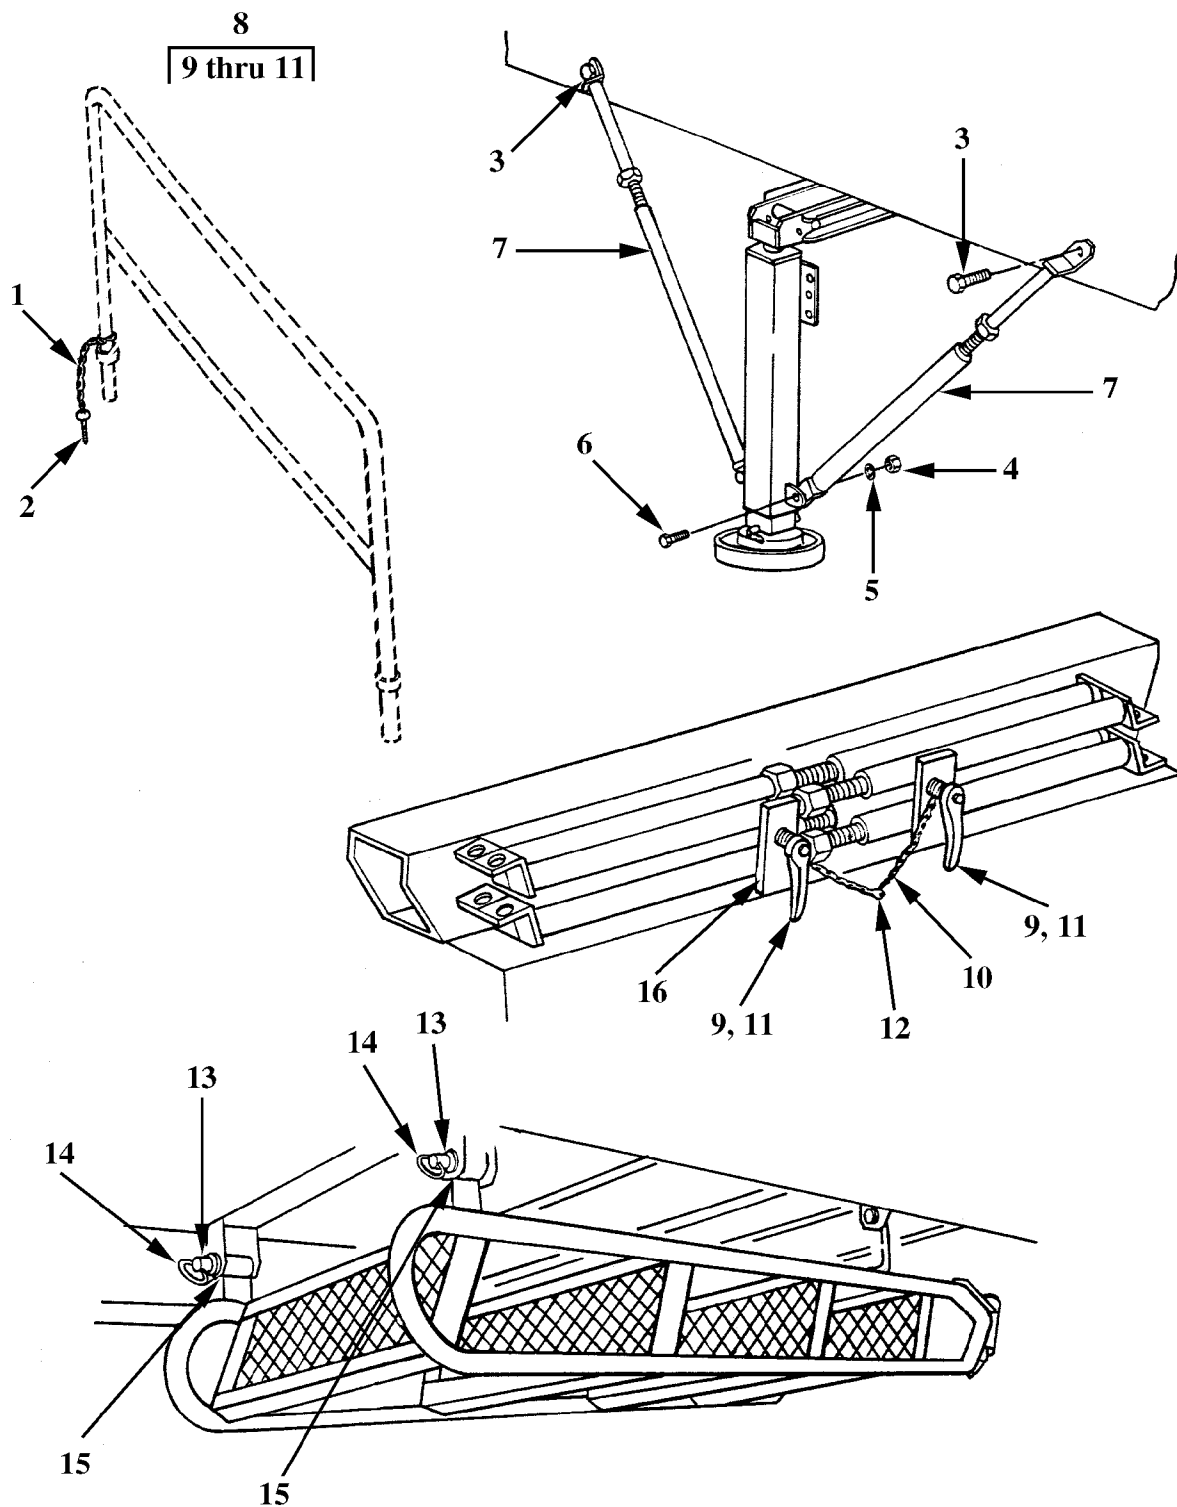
Ladder Stowage, Lifting Brace Stowage, Handrail, and Lifting Jack
